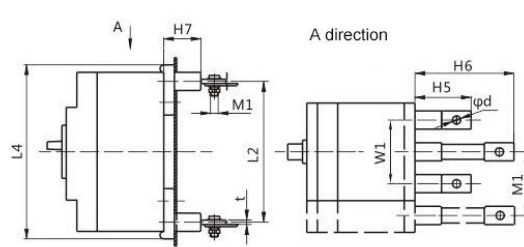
TXM1E-400/800 Fixed back-panel wiring
